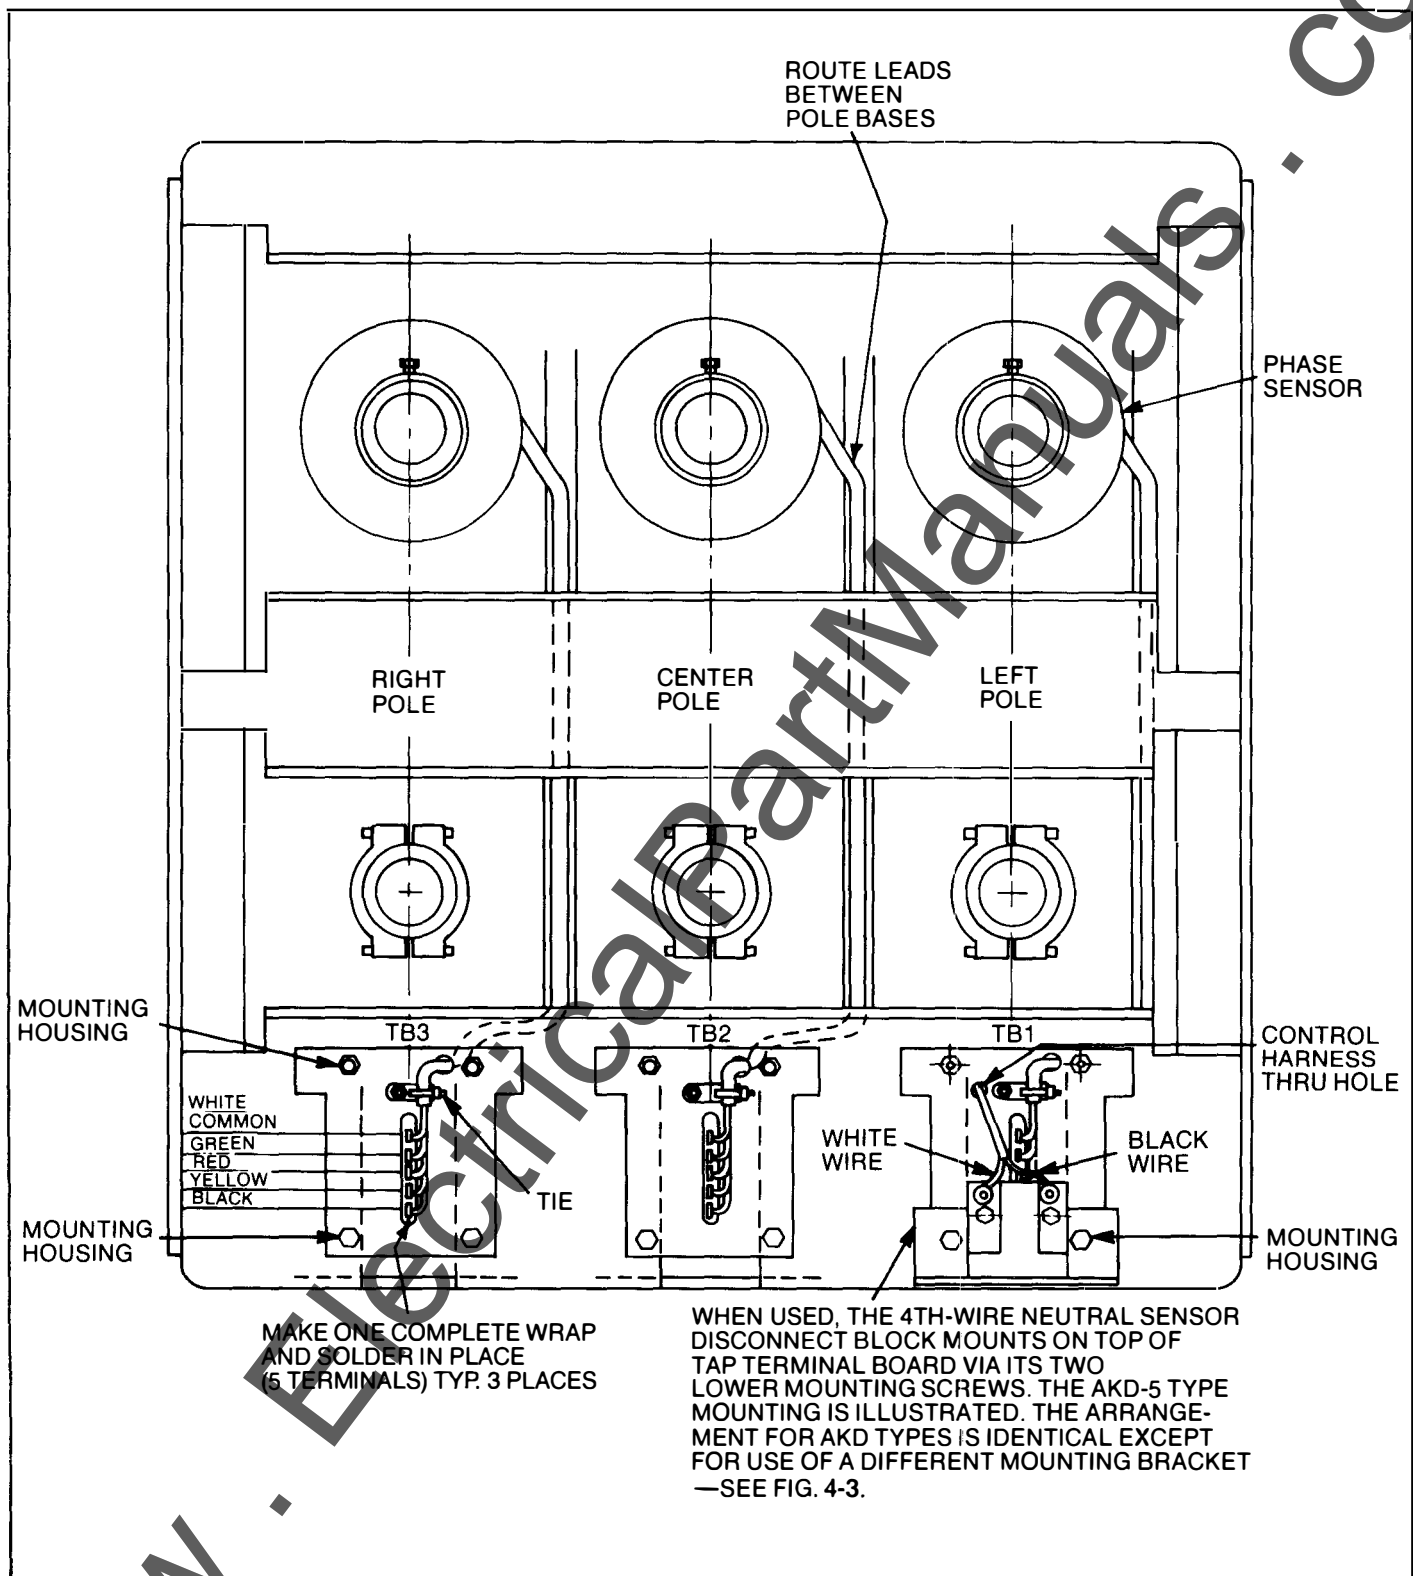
Typical AK-75/100 backframe conversion — rear view
